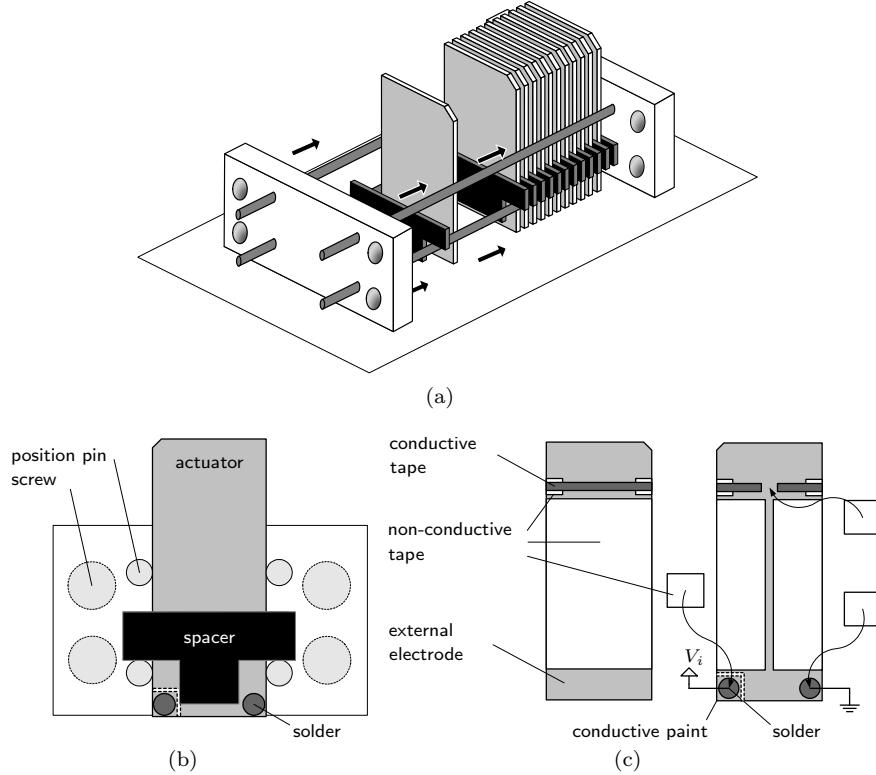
Assembly of the VBD's tactile display: (a) perspective and (b) frontal views of stacked assembly, and (c) actuator fabrication process.
